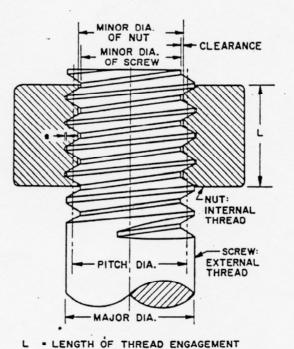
Comparison Between the Minor Diameters of a Screw and a Nut, Showing Clearance External threads and internal threads have the same basic pitch diameters.
